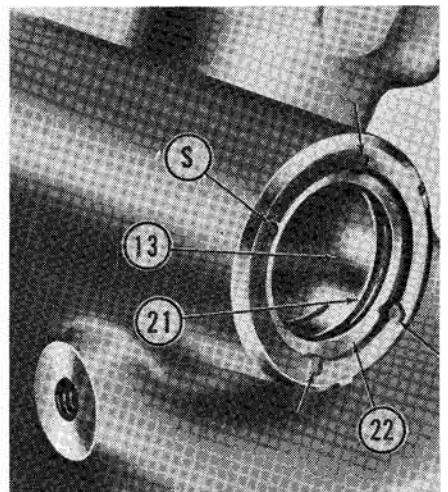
Seal retainer (22) (not used on late models) is retained in gear housing by staking (S) as shown. Oil seal (21) can be renewed without removing retainer.
